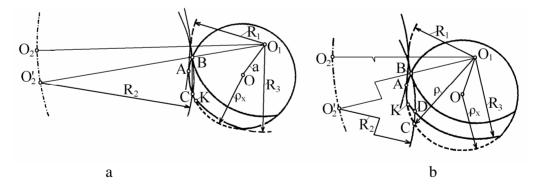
Schemes of cutting of a wheel into the blank: a – at contact point B wheel cuts only sector BAC; b – wheel cuts sector BAKD
